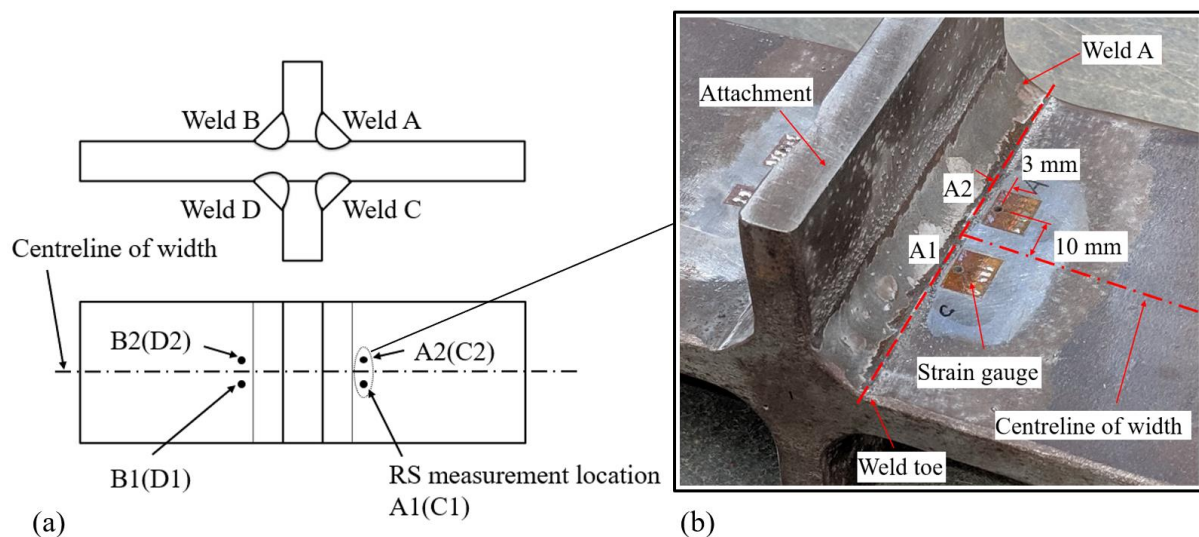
Locations where residual stresses were measured on the as-welded specimen: (a) schematic. letters in brackets refer to the measurement locations on the opposite side of the plate; (b) one actual test specimen.
